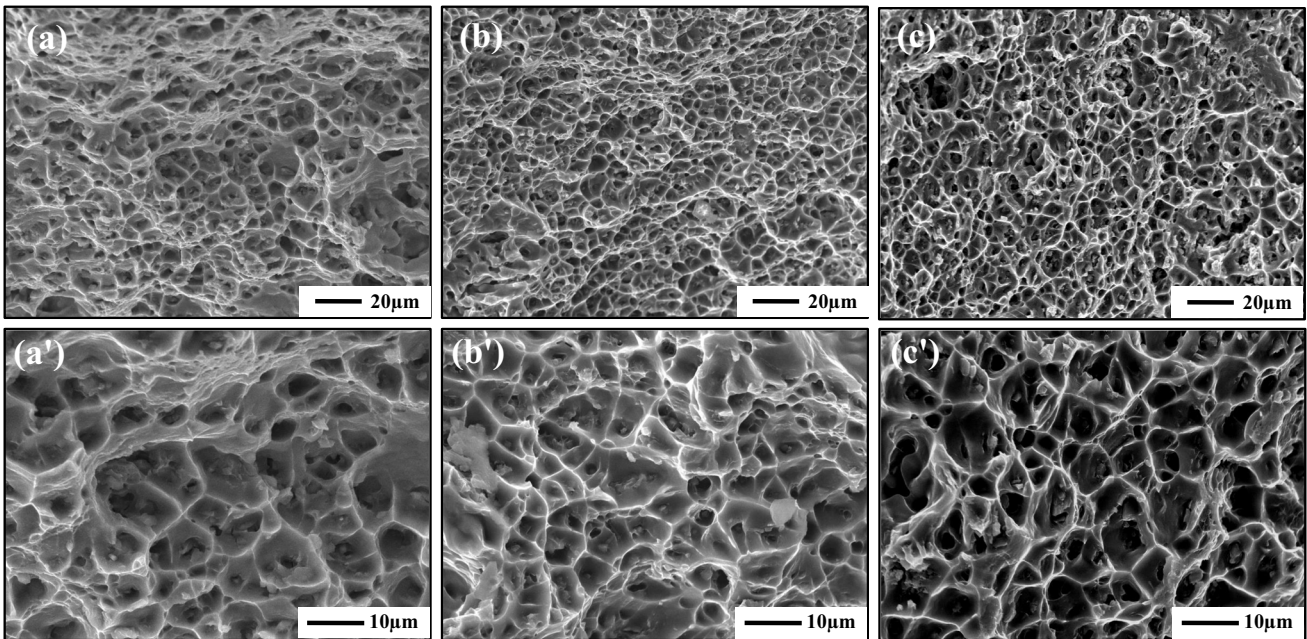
SEM micrographs of the tensile fracture surfaces of Al–Mg–Sc–Zr welded joints without reinforcement: S5000 (a) and (a'); S5001 (b) and (b'); S5002 (c) and (c')
